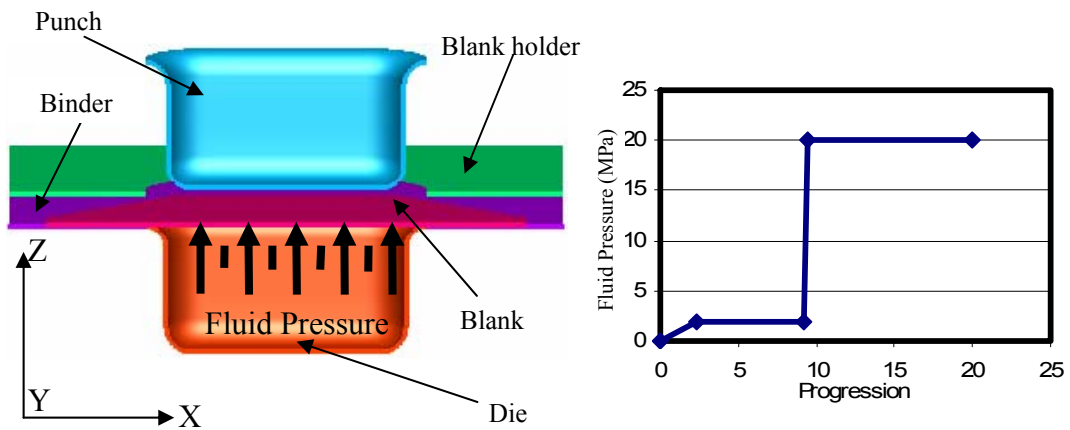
Hydro-mechanical deep drawing (aquadrawing) process setup and counter pressure exerted by fluid on to the workpiece
